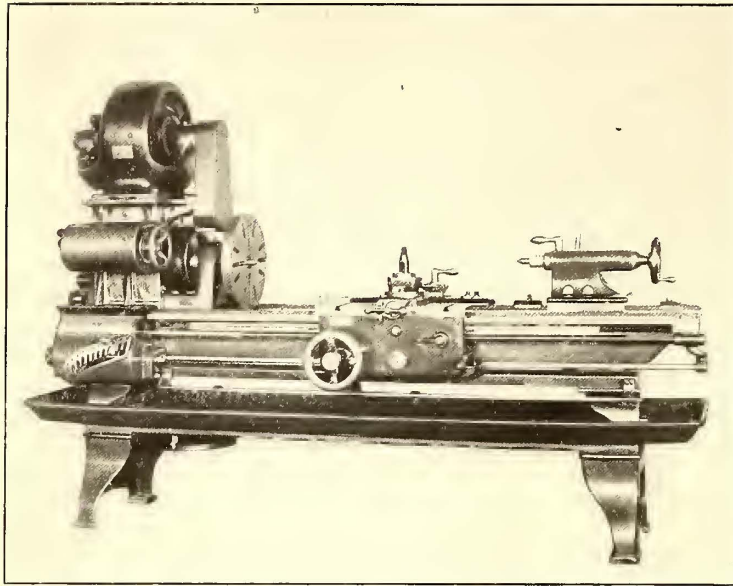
INTER-POLE MOTOR DRIVING 16-IN. HENDEY LATHE, THROUGH SILENT CHAIN. ANY DESIRED SPEED CAN BE QUICKLY OBTAINED
